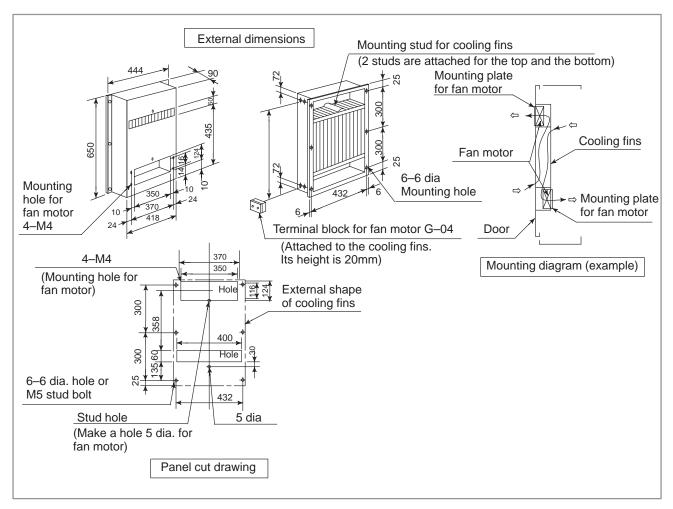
(c) External dimension and mounting method of cooling fin B (A02B-0053-K304)
